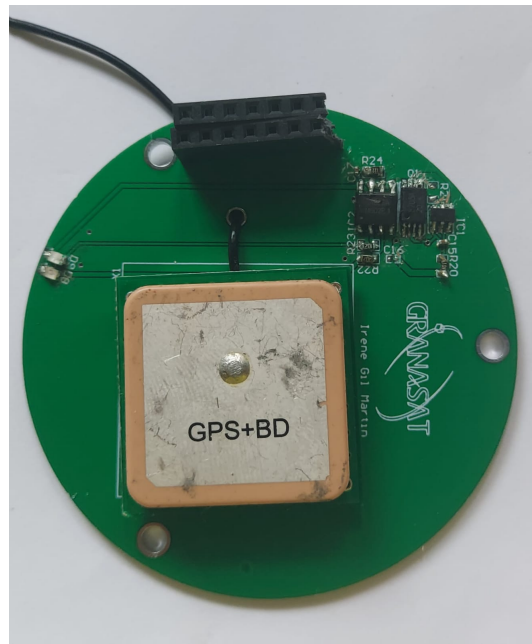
GranaSAT CanSat Main Board PCB soldered
